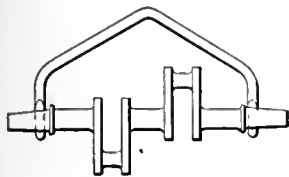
Machine Steel Sling for Lifting Crank-shafts.
